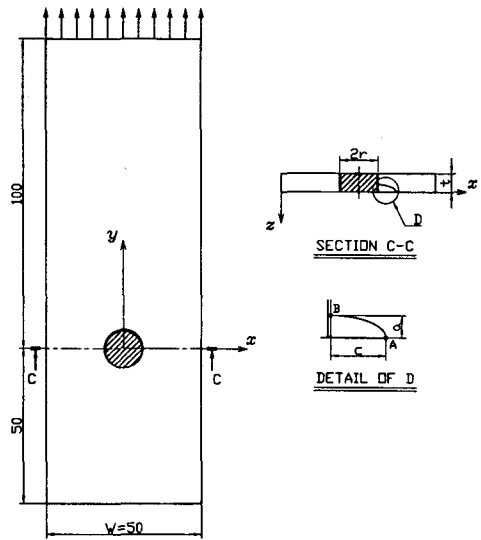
Configuration of a quarter elliptical surface crack in mechanical joints
